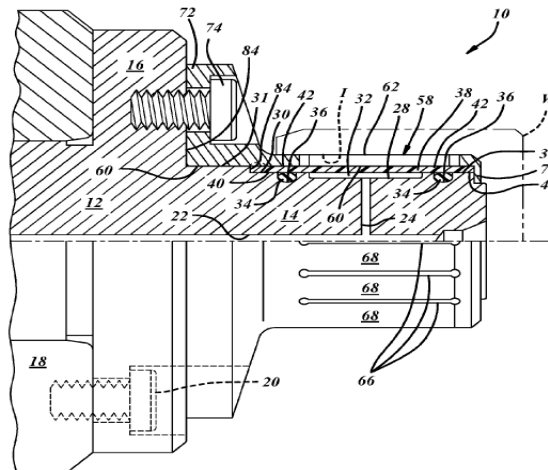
Fluid actuated workholder with a collet driven by a soft and thin bladder [36]
